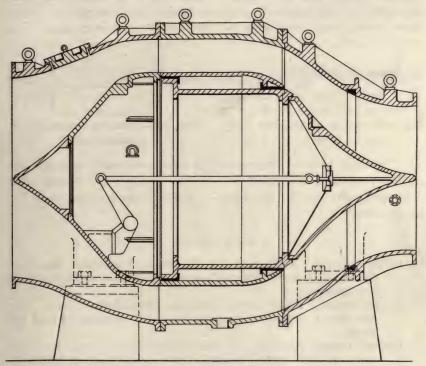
Longitudinal Section of the Johnson Penstock Valve.
